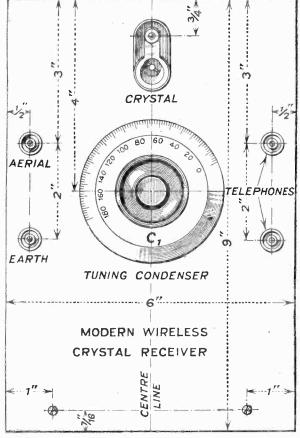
The drilling of the panel may be carried out with the aid of this diagram.
